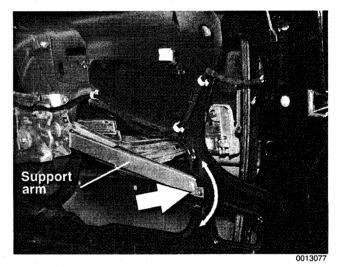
Use 5mm Allen socket to loosen mounting bolt at support bracket (arrow) and slide bracket up or down to adjust window position at roof line. (Allen bolt head faces outside of door.)
